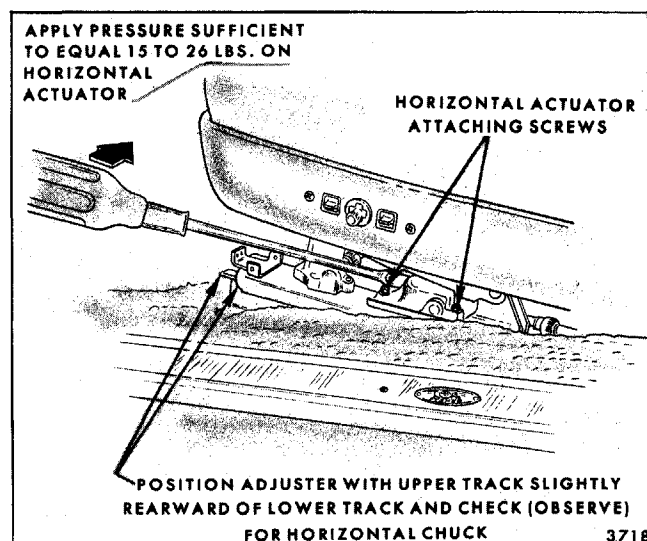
Horizontal Actuator Adjustment - Power Six-Way Seat
